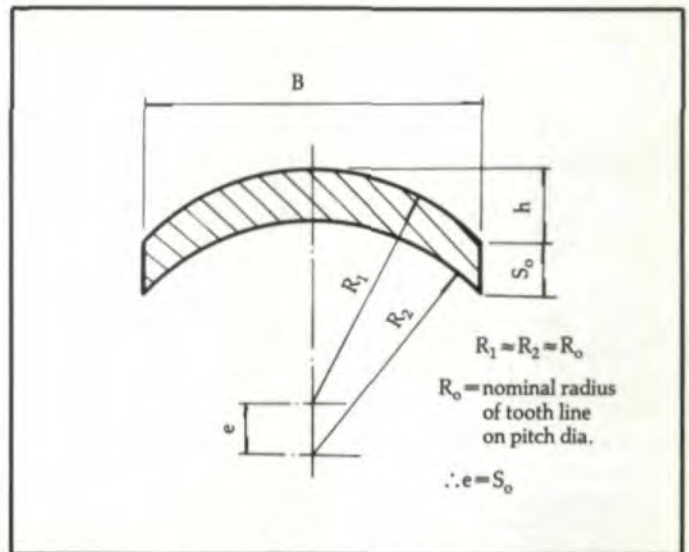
Cross section of the tooth root of a circular tooth gear.
